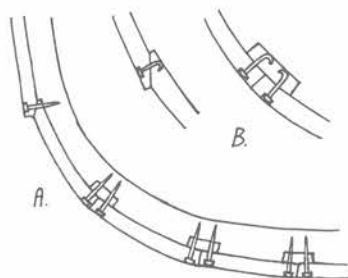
Fastening planks. A, boat nails; B, clinch nails.
